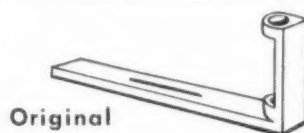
Former Design of bracket was gray iron . . . is now fabricated from 12 gauge steel. Steel design is rugged, durable, will not fracture.
